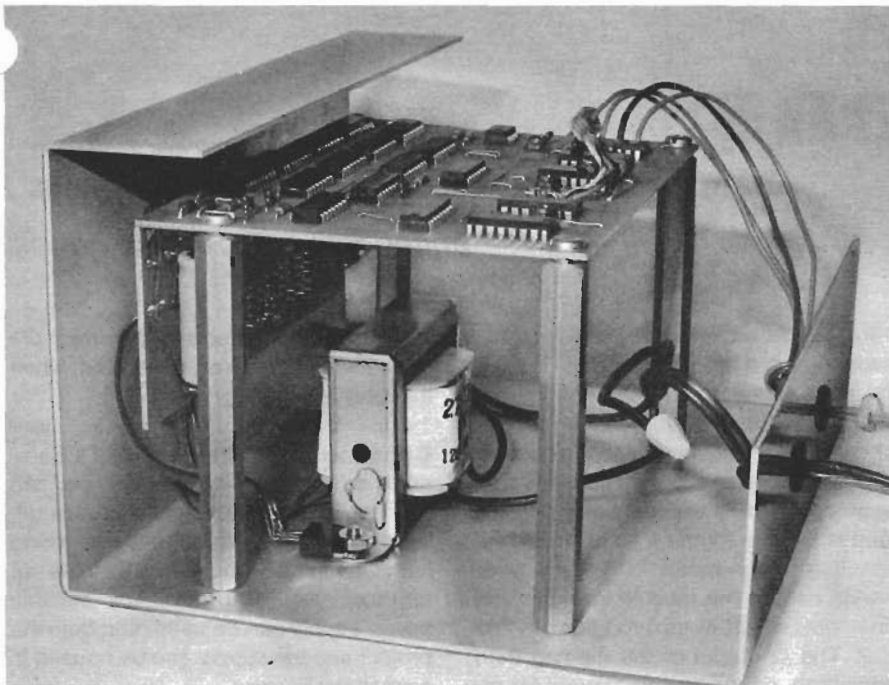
Interior view of author's prototype reveals printed circuit board mounting details.
